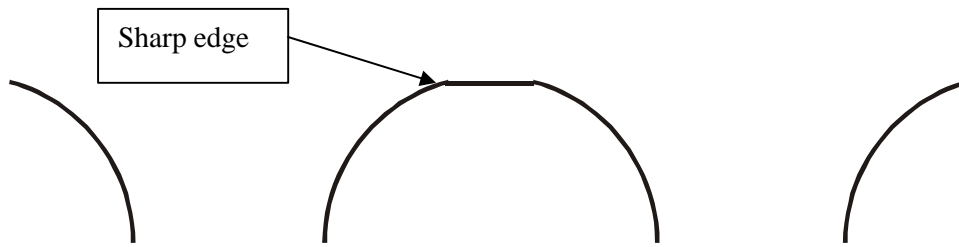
Appearance of radiused holes on light baffle end of central hub as inferred from figure 9. Note the flattened tops due to incorrect machining. This will be confirmed using the 3-D coordinate measuring machine at Cardiff.
